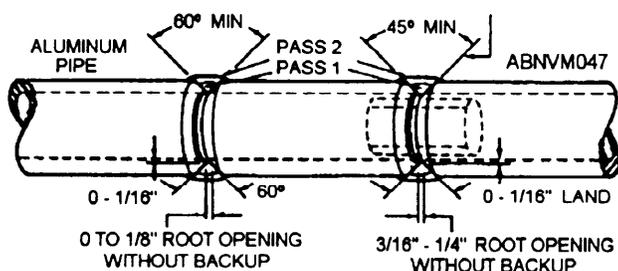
Joint design and weld pass sequence horizontal fixed-position multipass GMA welding.
